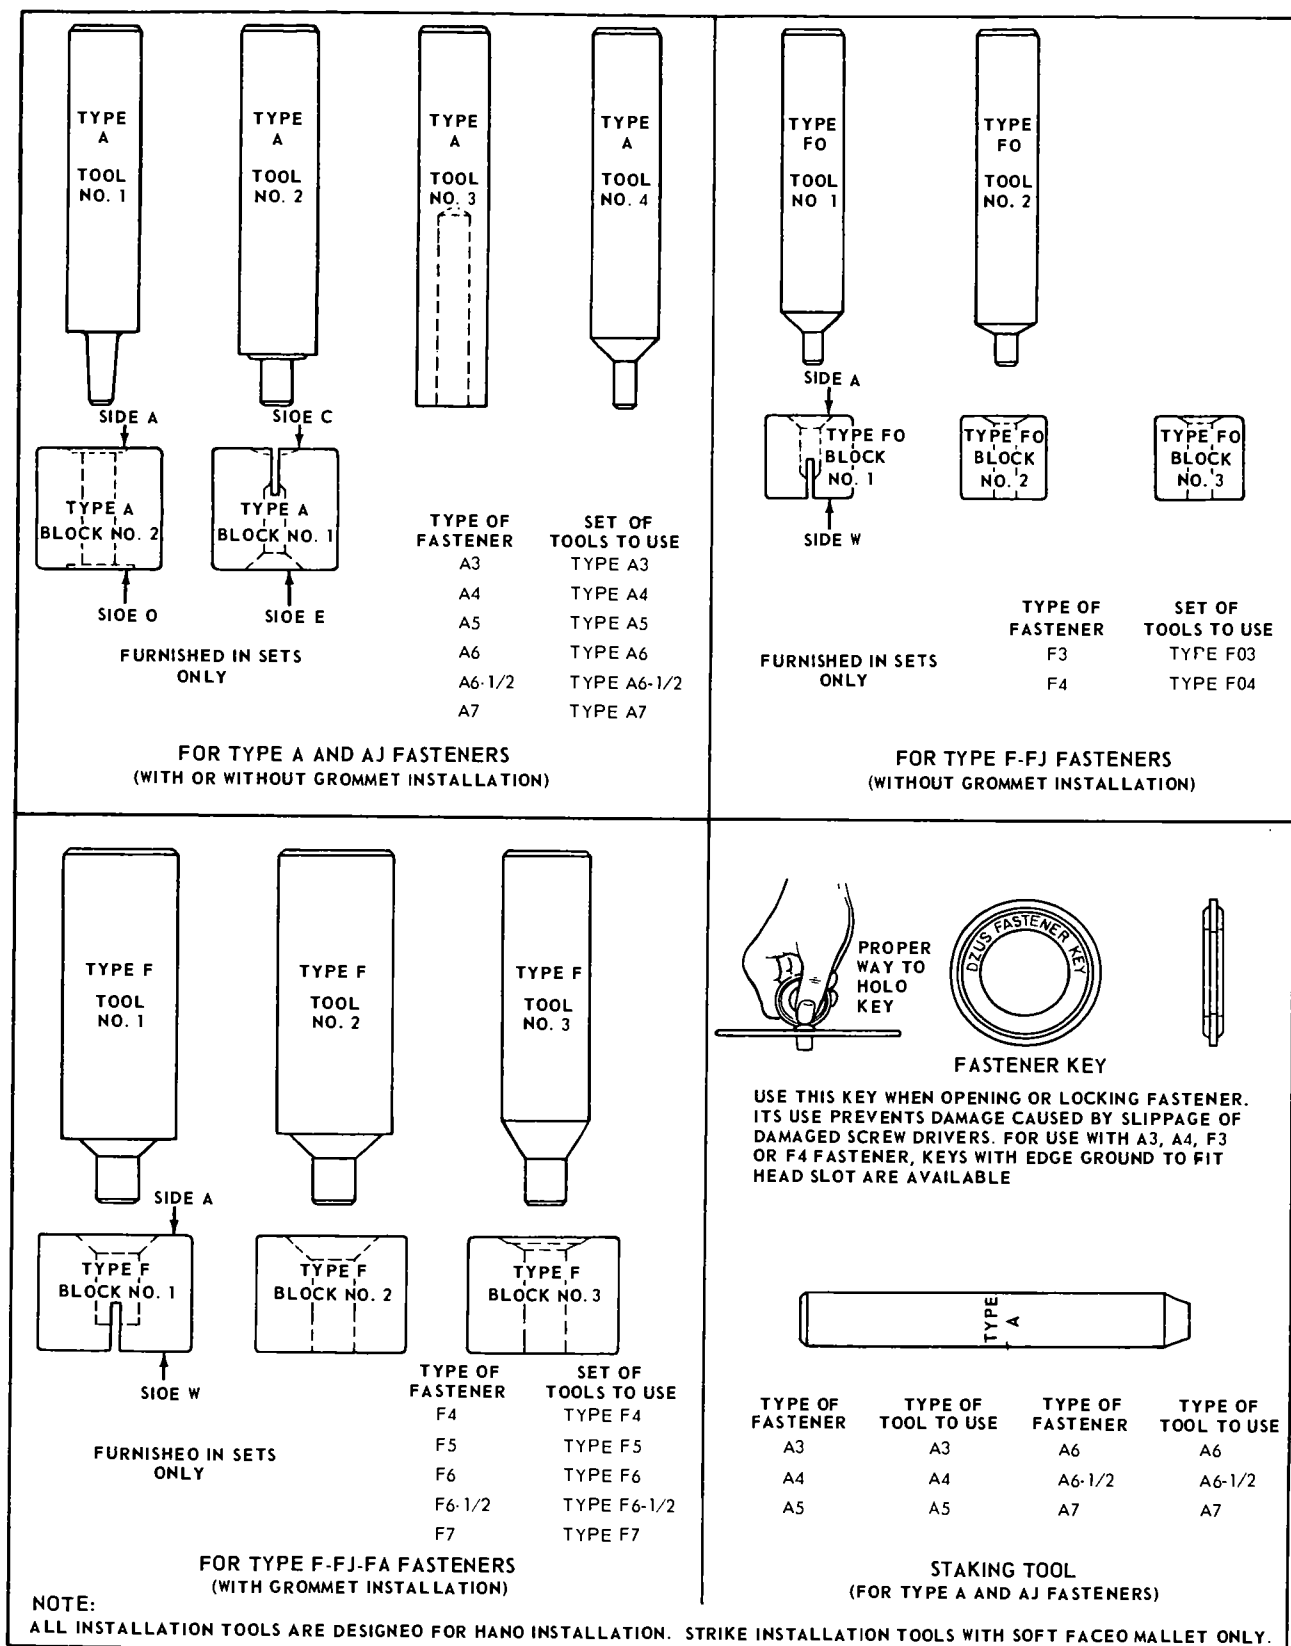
Installation tools for type A-AJ and F-FA-FJ dzus fasteners.
